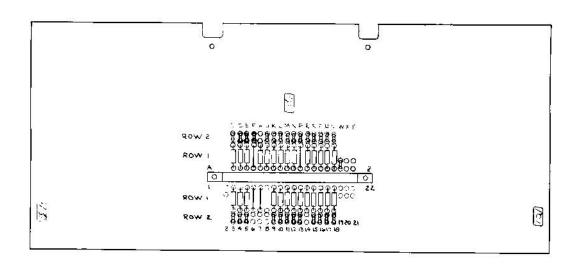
LED Pushbutton Switch Assembly (Red) 60-002
